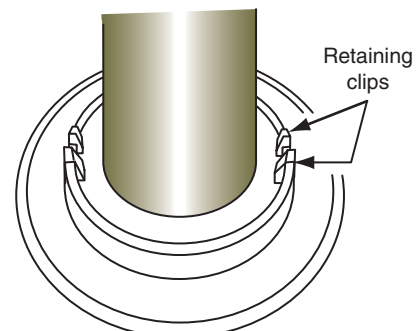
Disconnecting the air line from the air spring solenoid valve.
